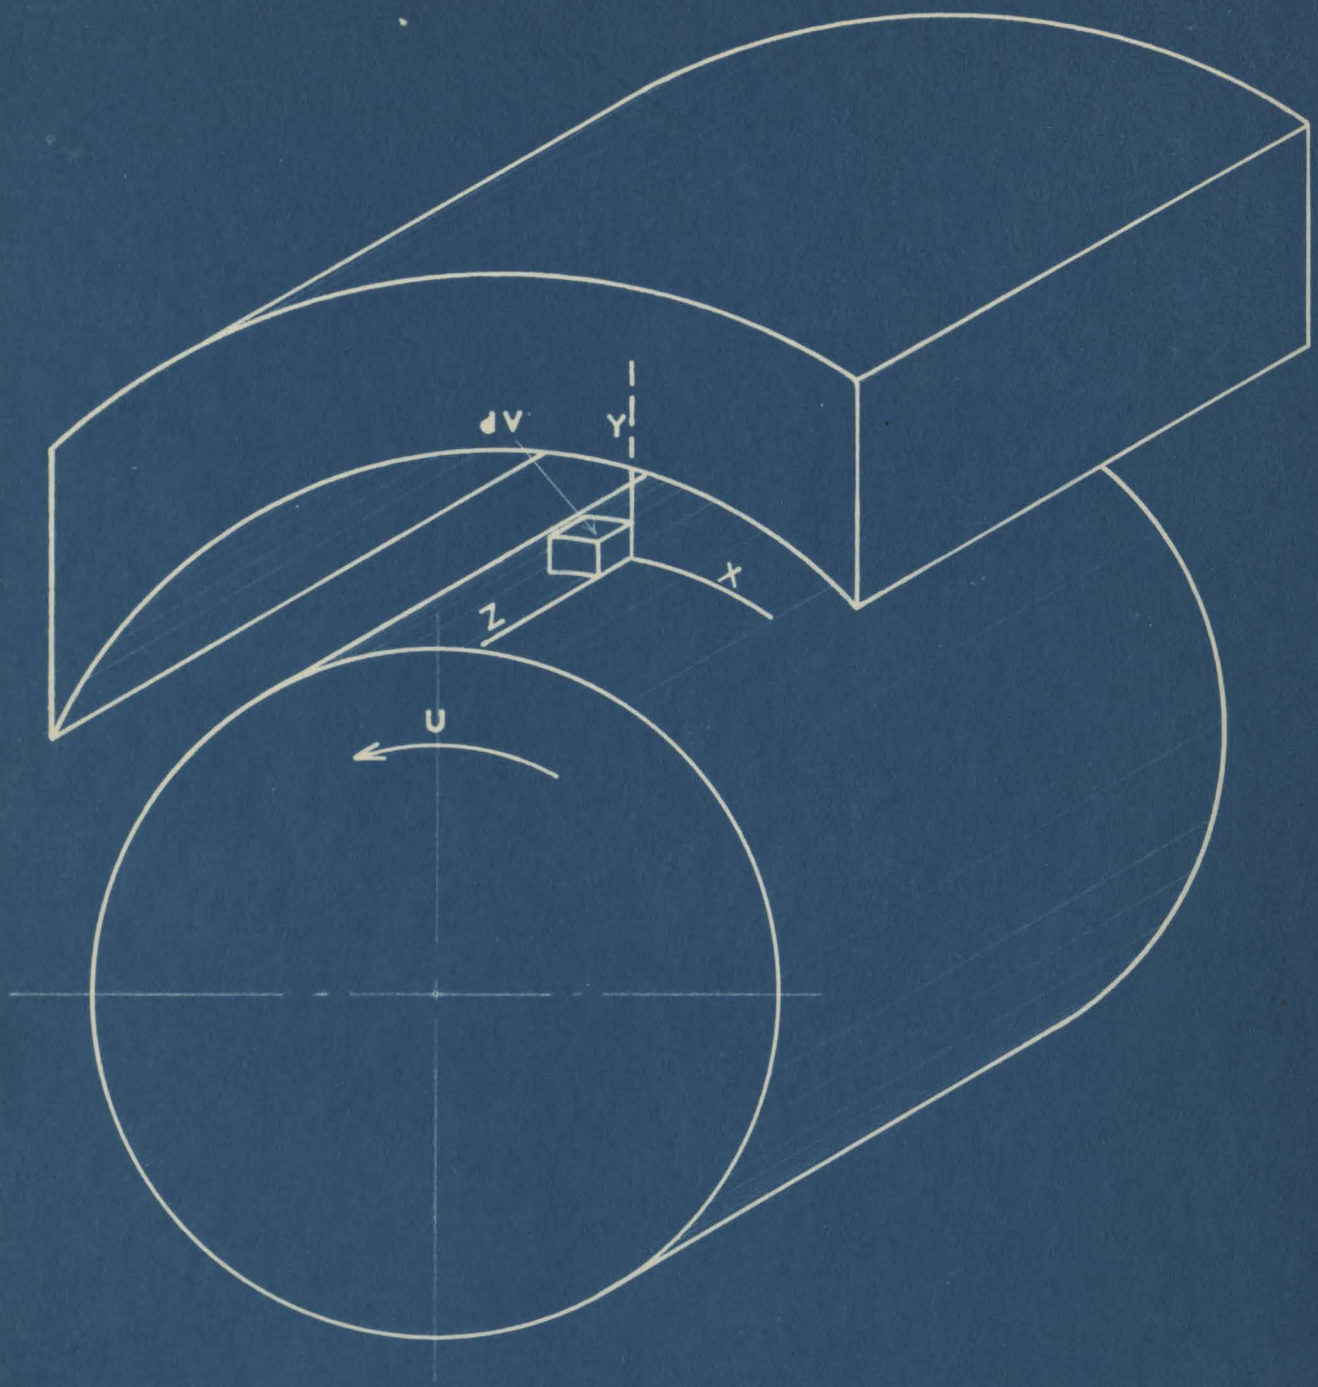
Journal Bearing With Clearance Exaggerated to Show Any Small Element of Volume of Oil in the Clearance. (The x axis is taken in the direction of motion, the z axis is perpendicular to the direction of motion and parallel to the surfaces, and the y axis is perpendicular to both the direction of motion and the surfaces.)
